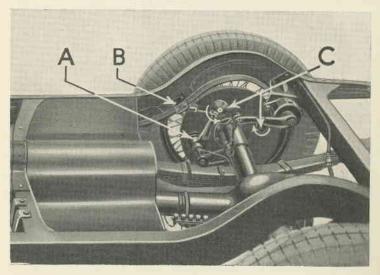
Rear Brake Adjustment. (A) is the Hand Brake Camshaft Lever, and (B) are grouped lubrication nipples (a similar plate is on the near-side of chassis frame) for the Rear Springs. The nuts (C) operate the Brake Shoe Adjustment Cams.
